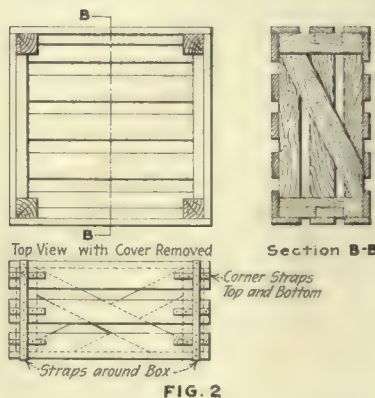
PACKAGE FOR MEDIUM MACHINERY
